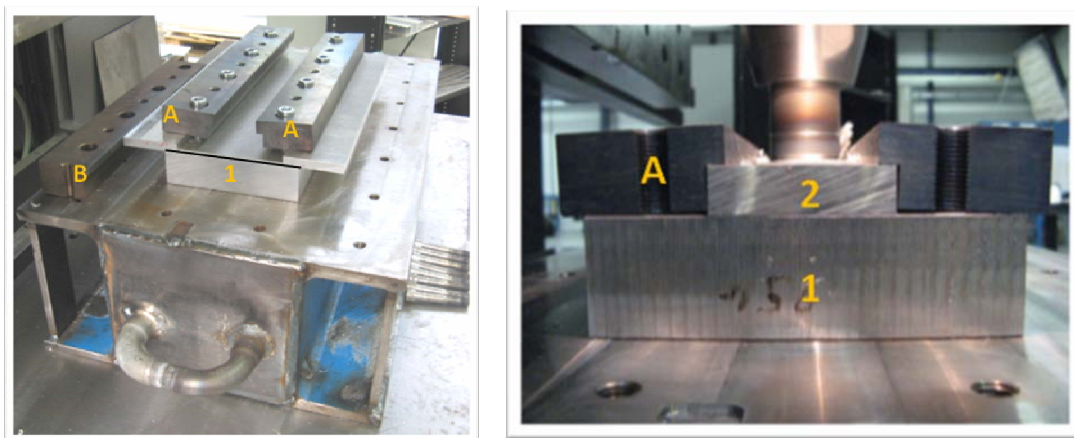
Experimental setup at CEWAC of the backing plate and clamping equipment for application 2.
